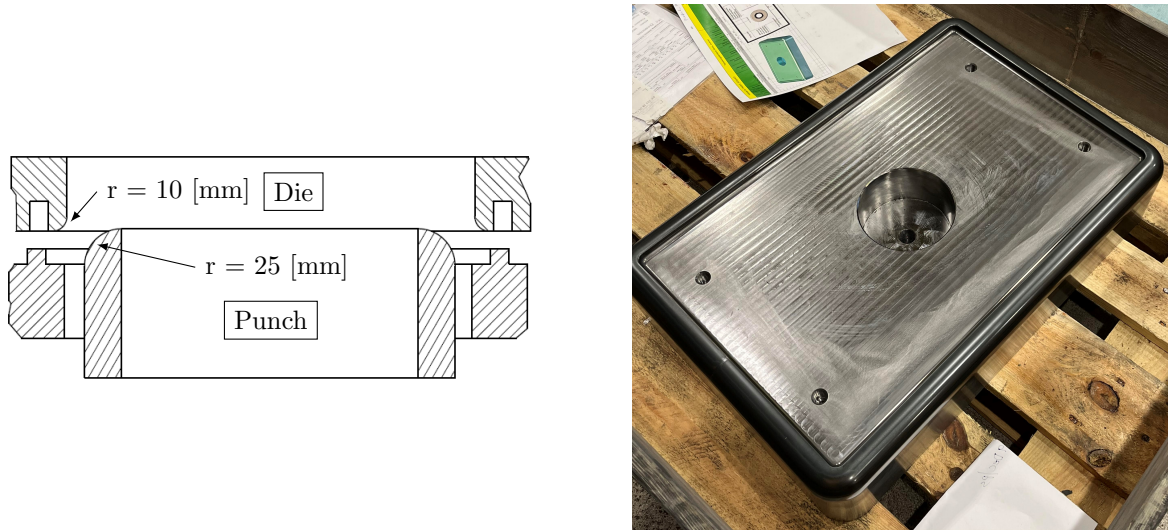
Cross-section of entire tool geometry and the manufactured punch.
